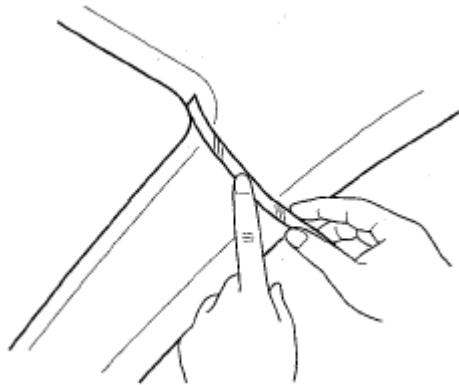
Marking Upper Edge Of Pillar Trim Using Masking Tape On Headliner
